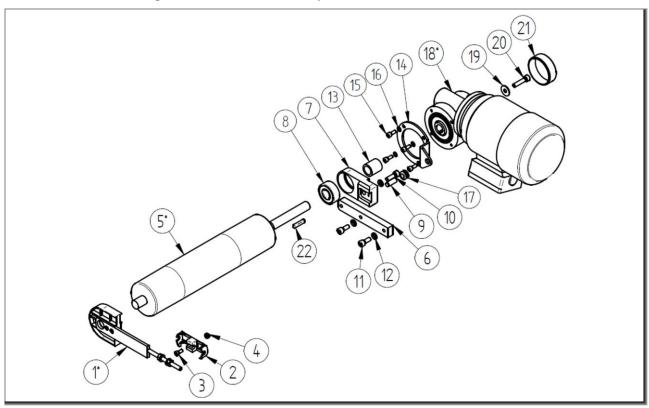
Parts list: Flange drive unit - drive unit - position of drive unit 23 - ZZ.900.0034.00
